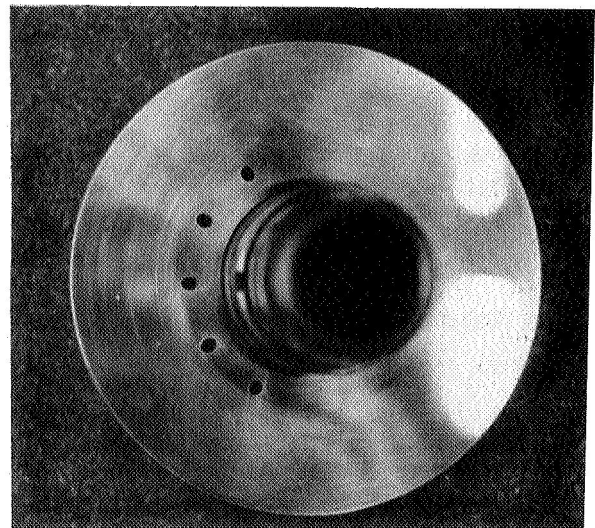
Pheldor 10 Shoes and Thrust Bearings and M-2 Swash Plate After 2 Hours at 500°F With F-50 Silicone Oil
